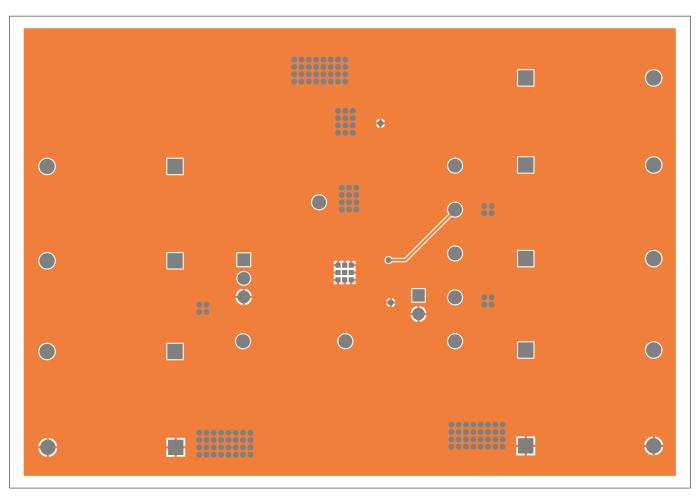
Bottom layer TLS820F3ELVxx demoboard
